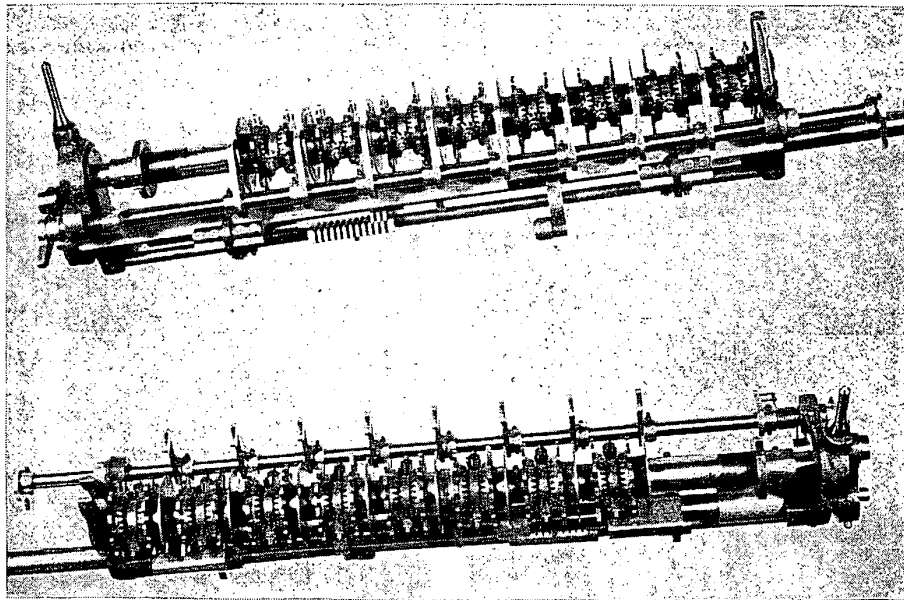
Bevel-gear parts used in a cash-register machine. (Courtesy of Gleason Works and National Cash Register.)
